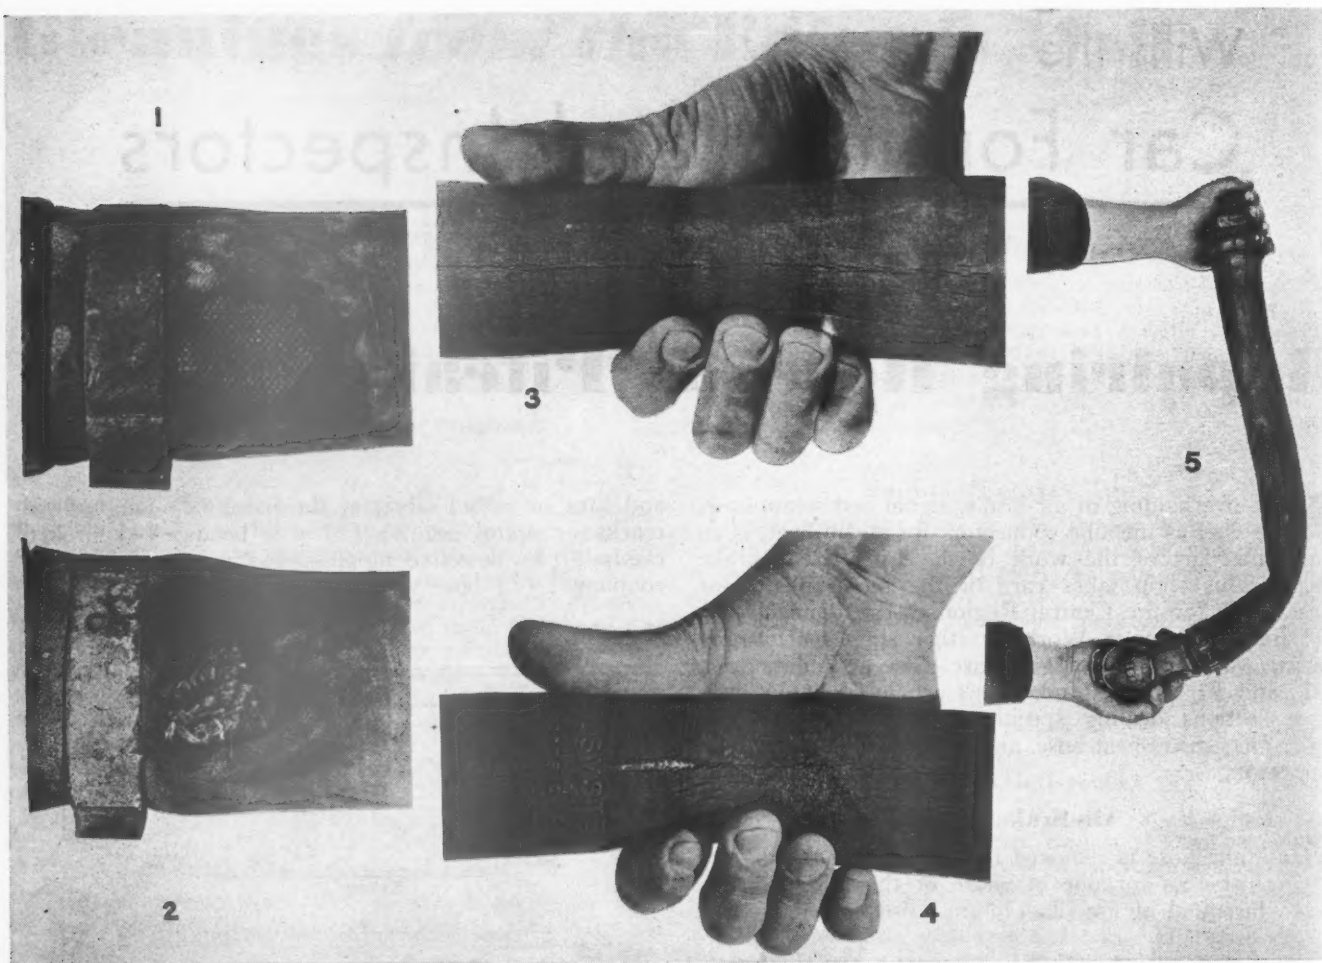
Examples of defective air-brake hose—(1 and 2) Holes in outer cover and fabric at the hole torn or rotted; (3 and 4) longitudinal cracks; (5) an example of a soft bend
